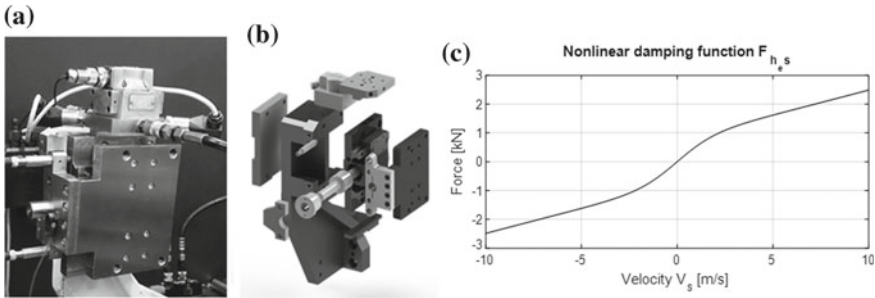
a The experimental test stand b exploded CAD view c damping function
